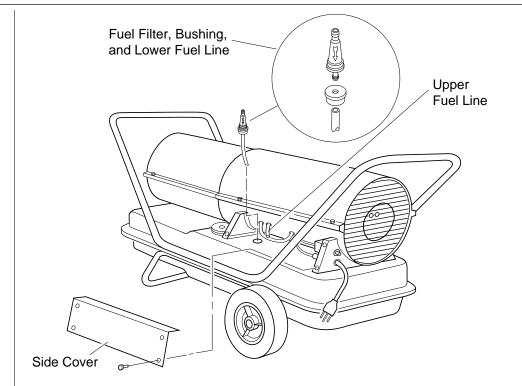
Fuel Filter Removal, 26,4 kW (90,000 BTU/Hr) Model
